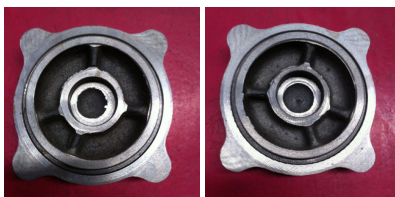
Parts through casting is too rigid, making o-ring grooves machined through an uneven surface (a, and b) [17]
